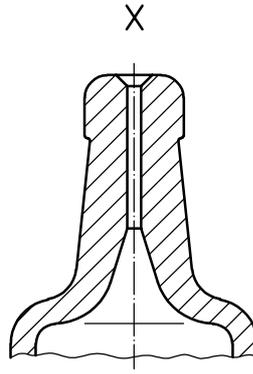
Model A: head design of a glass barrel with a 6 % Luer cone in accordance with ISO 594-1
